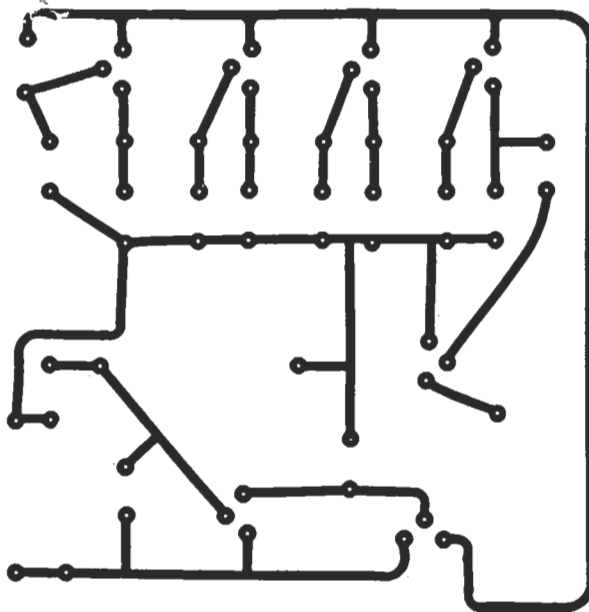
You can use the foil pattern at left to make up a printed circuit or assemble components on perf board.
